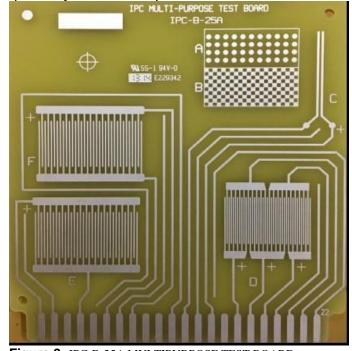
IPC-B-25A MULTIPURPOSE TEST BOARD
